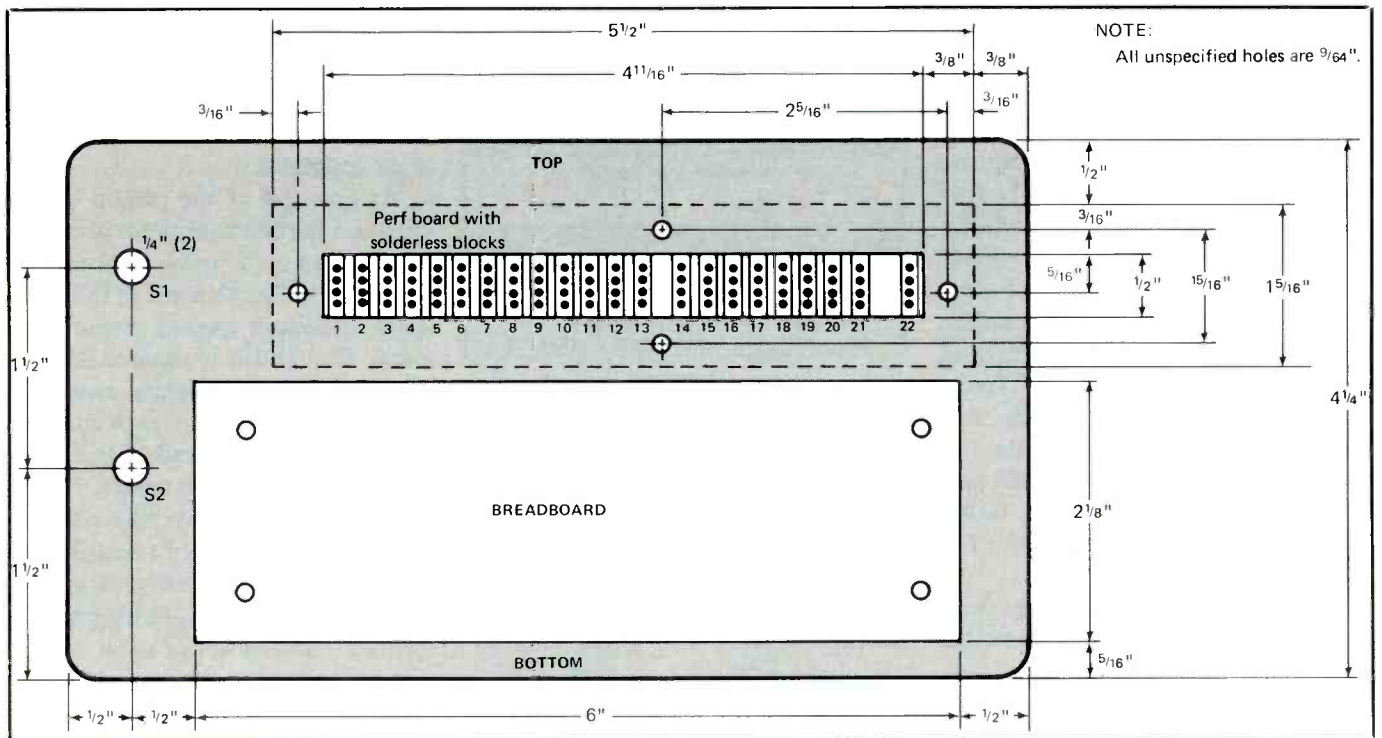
Top of box must be machined to accommodate breadboard, switches and distribution block assembly.
